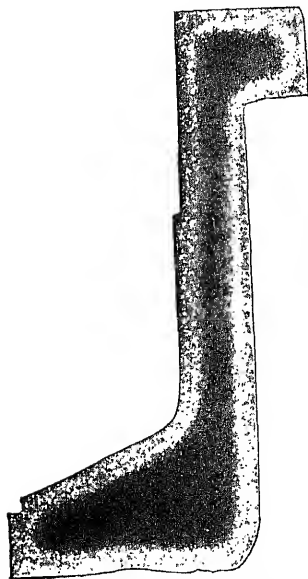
Section of case-hardened axle-bearing. 4 X.
